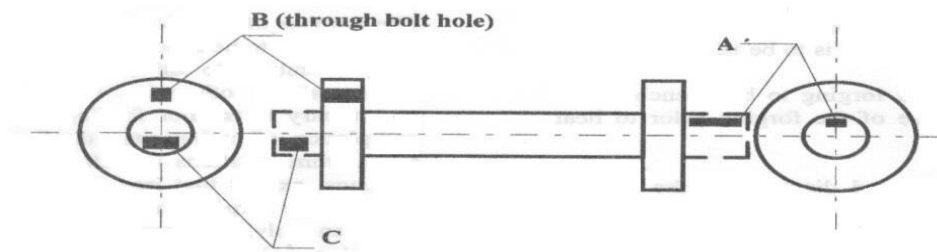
Sampling of flange forgings and its number
